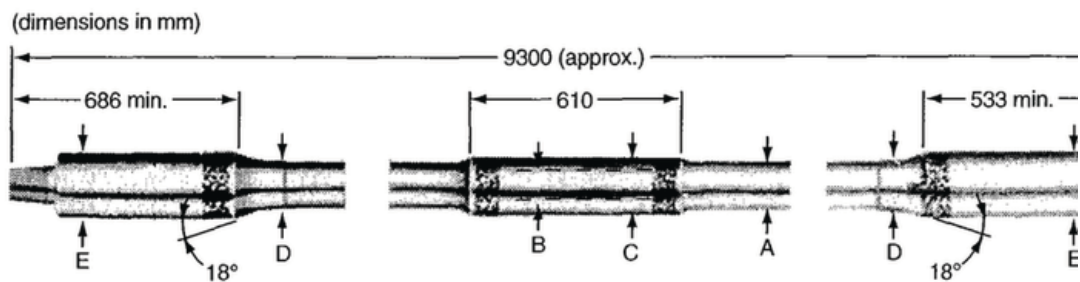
Heavy Weight Drillpipe Dimensions (Gabolde & Nguyen, 2006, p. B47)
